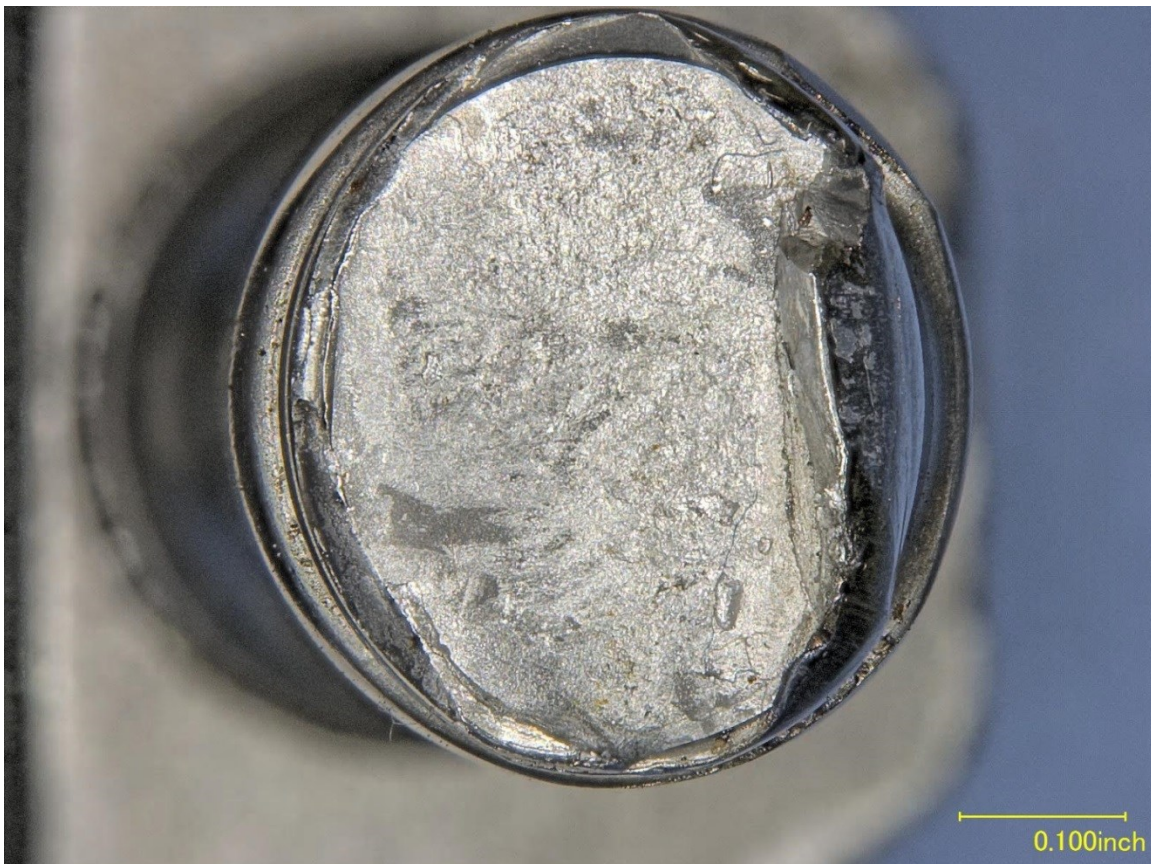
The fracture surface of the #1 rod yoke bolt, shown in Figure 12.
